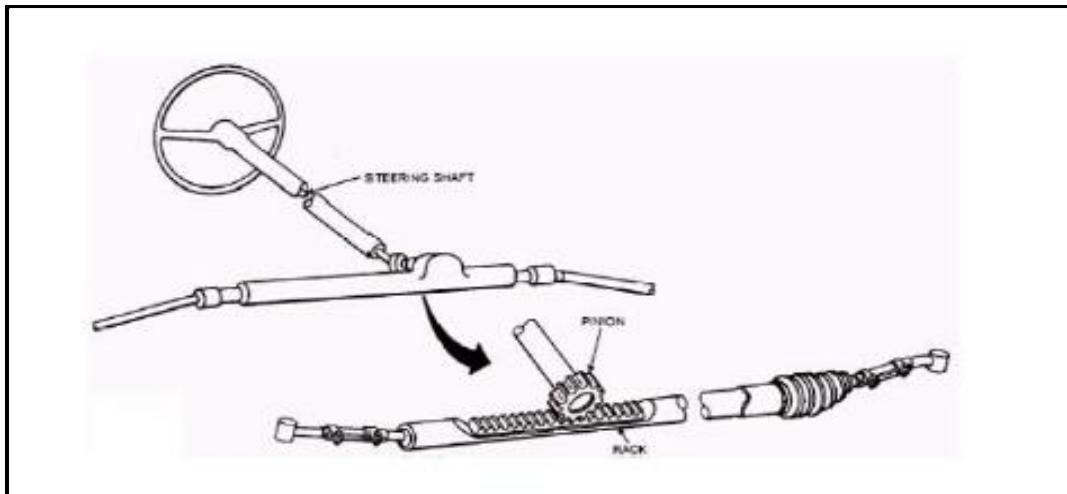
Illustrative positioning of the rack and pinion gear system
